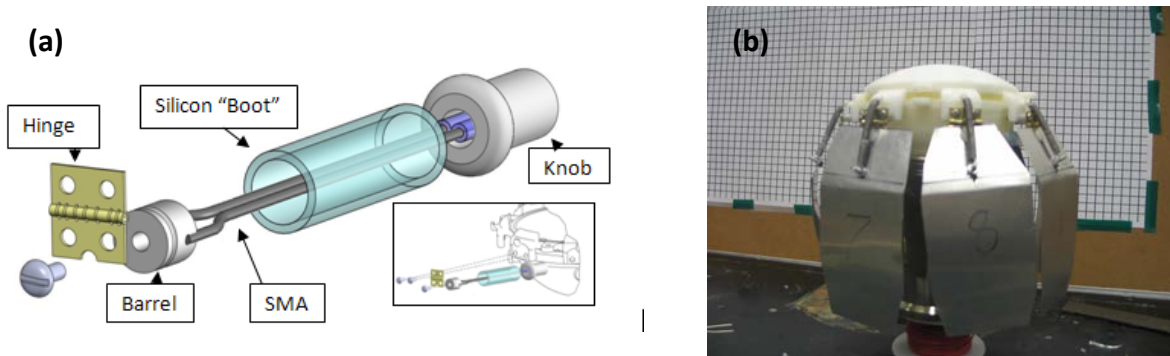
(a) CAD model of exploded connection assembly for the bell segment and main body junction, (b) Side view of fully constructed JetSum.
